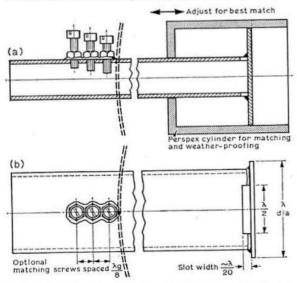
A simple feed for dishes having a f/D ratio of 0·25-0·3. (a) Section showing the use of an optional Perspex matching and weatherproofing sleeve; (b) side view showing alternative method using matching screws
